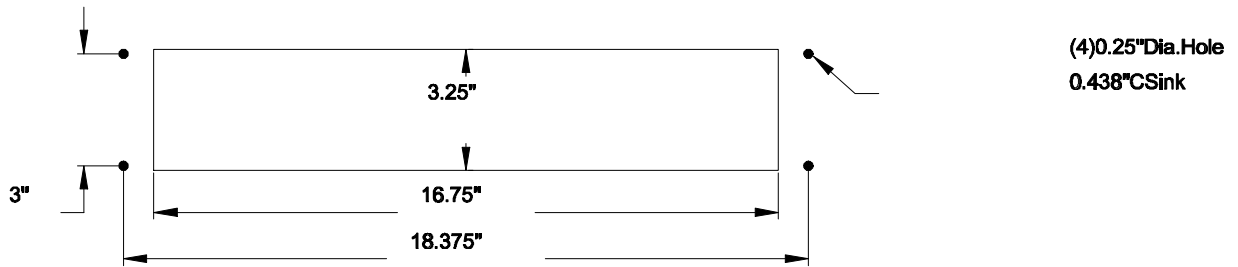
Panel Mounting Detail For Rack Mount Enclosure
